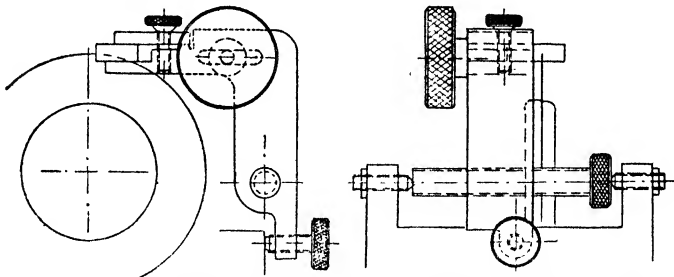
Principle of the T.C.M. hardmetal cutting machine
